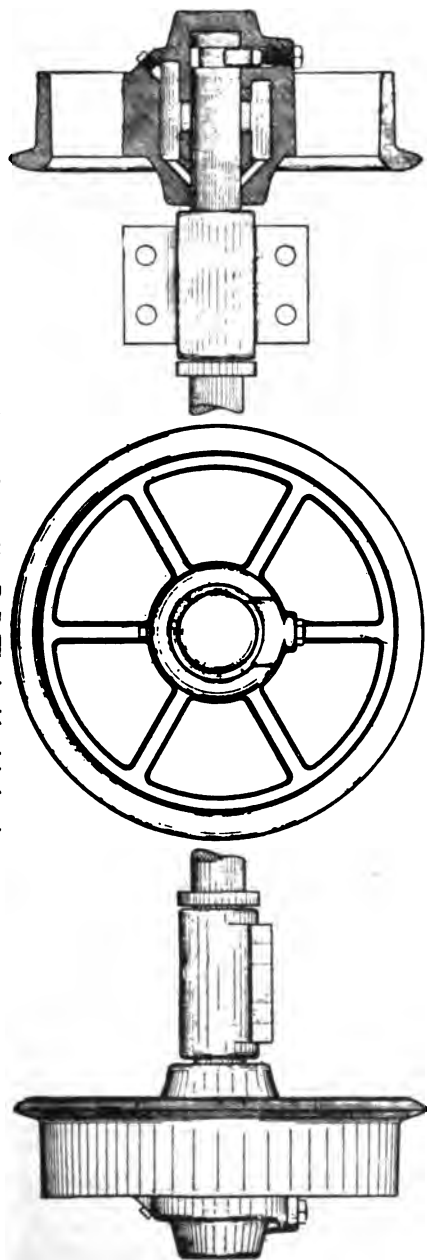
, Sec. 1066.—D. P. Wheel with plain bearing.
